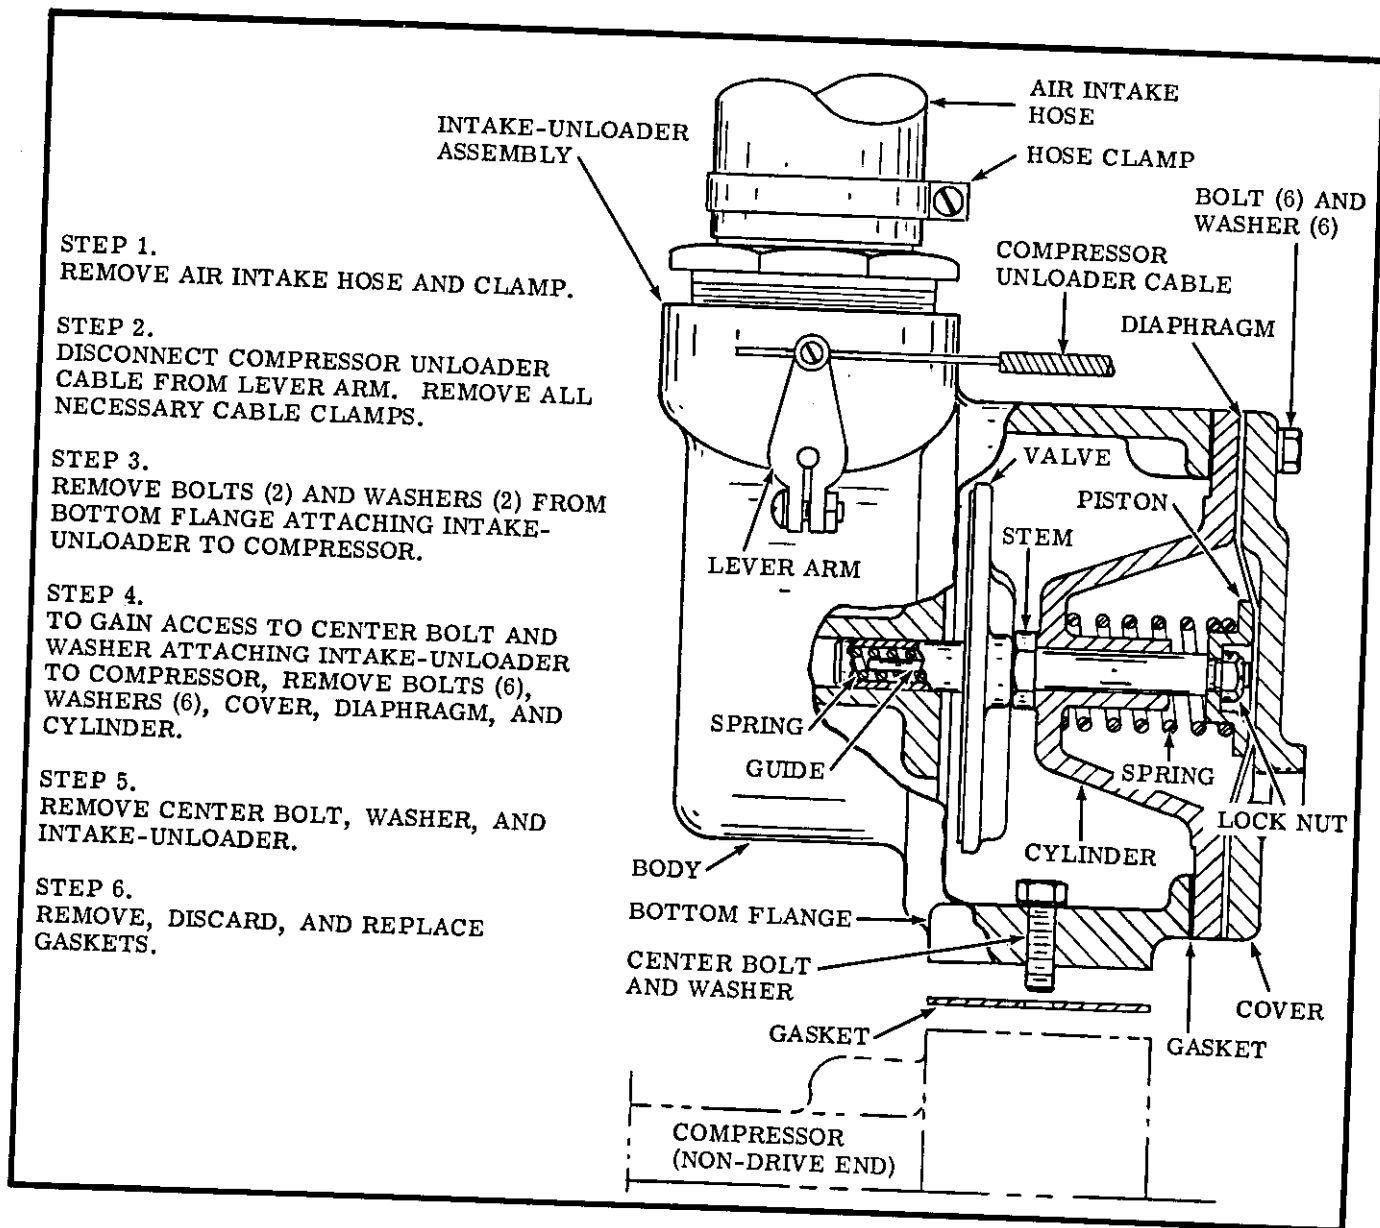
Compressor Air Intake-Unloader Assembly, Removal and Installation
